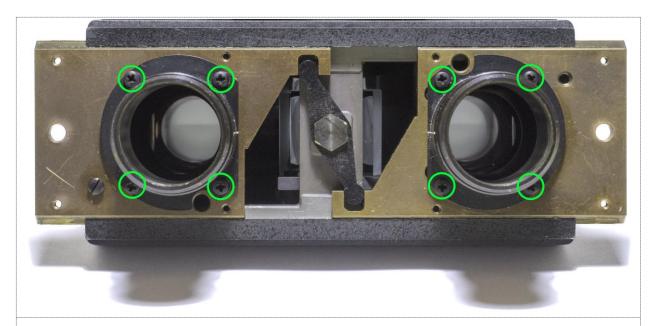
The same head as in Figure 16 but after the shields have been removed. The green circles indicate the screws that attach the eyepiece tubes to the head.
